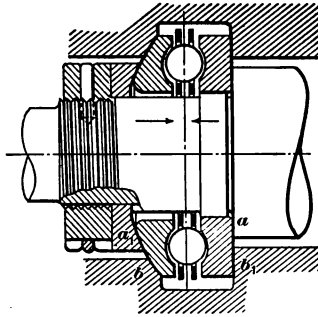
Thrust Load in Two Directions on One Collar Bearing
